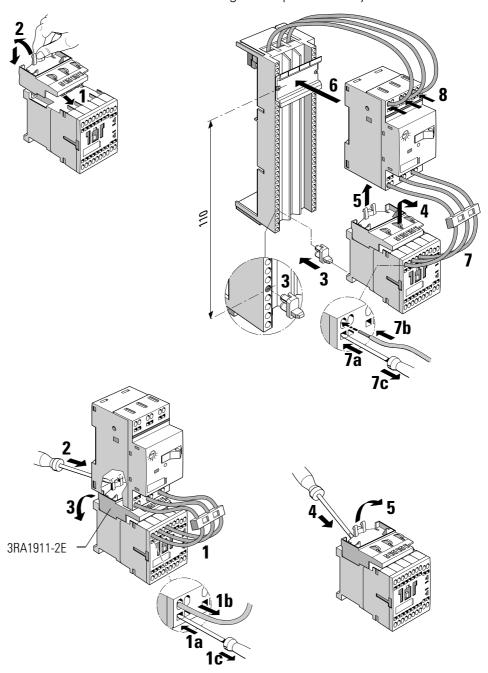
Self-assembly, busbars, direct starters (frame size S00/S0, Cage Clamp)
